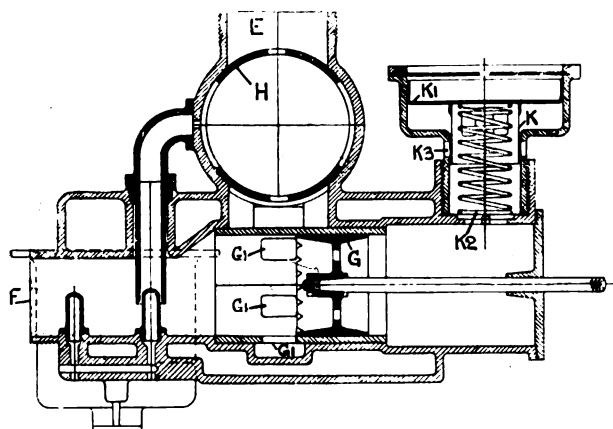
The Brooke "Automatic" Carburettor. Section through the mixing-chamber, the spray jets, the throttle-valves, and the atmospheric auxiliary-air-valve.
